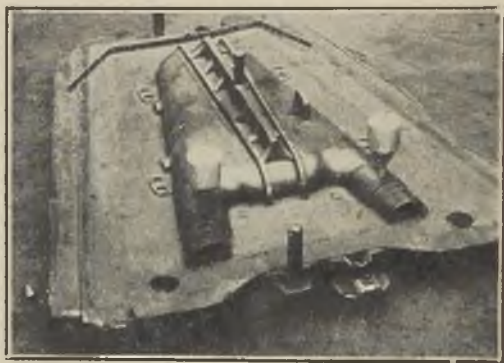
PATTERN PLATE FOR TOP WATER PIPE. TOP AND DRAG RUNNERS MADE FROM THE SAME PLATE CORE HAS 3-POINT BEARING. NO CHAPLETS ARE NECESSARY TO SUPPORT CORE. EACH MOULD PRODUCES TWO CASTINGS.
